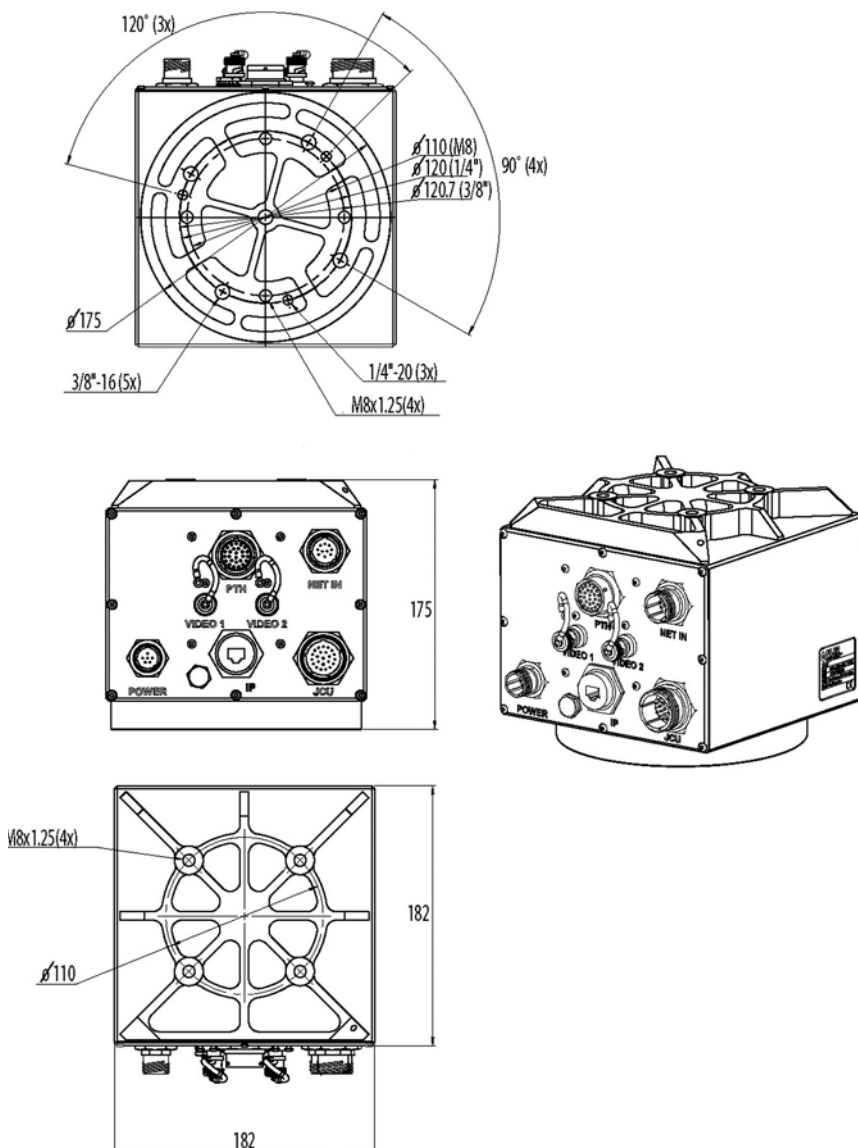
Basic dimensions – JPC2 (Basic dimensions in mm).
